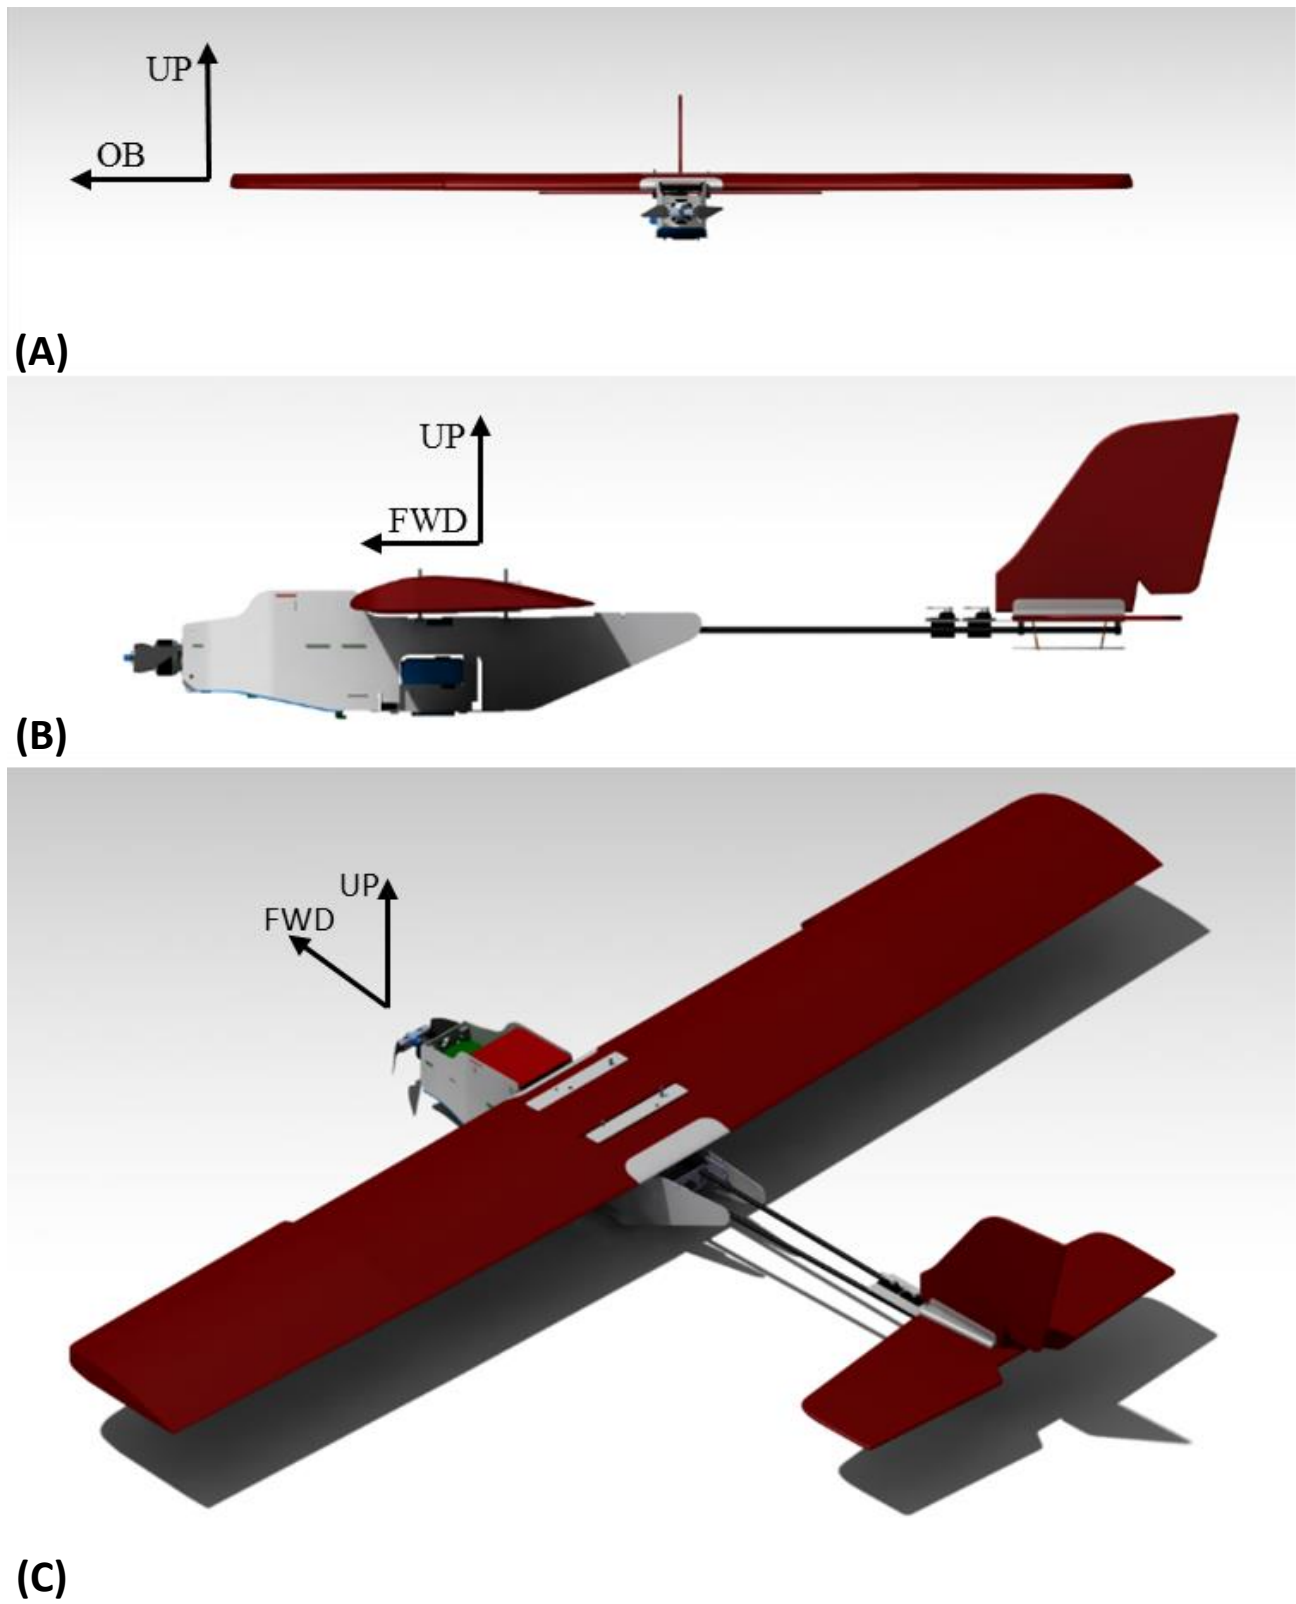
Fixed-wing CAD model: (A) front view, (B) side view, and (C) isometric view.
